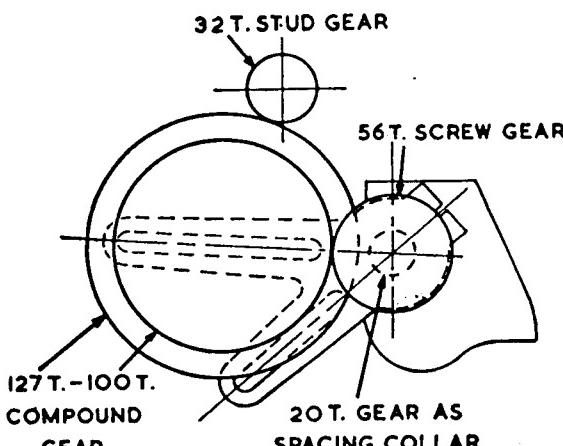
Diagram showing standard English Change Gear Lathe Set Up for Cutting 4 mm Pitch Thread
